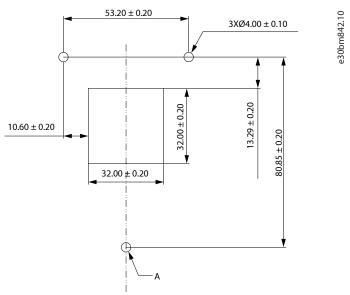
Layout Drawing of RJ45 Port and Screw Hole Locations on the Rear of Control Panel 2.0 OP2
